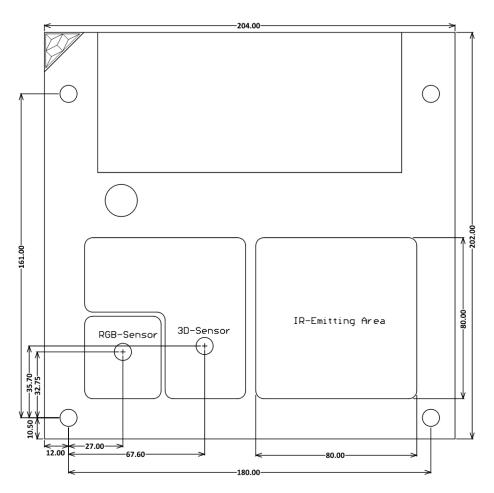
Sensor position and IR-emitting area (dimensions in mm)
